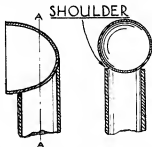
Section through vent cowl. Note square shoulder left in hole by filing, which must be removed before soldering
